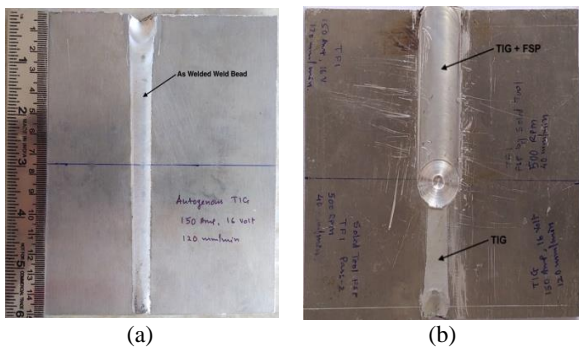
As welded appearance of (a) Autogenous TIG welded plate, (b) TIG + FSP plate
